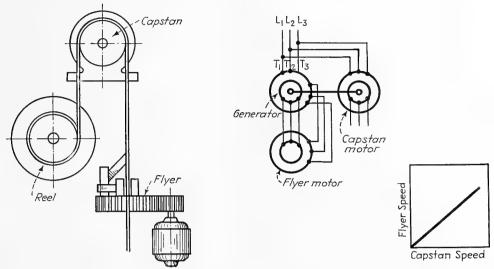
A wire-insulating machine requires a constant speed ratio between capstan motor and flyer for starting and running. The capstan motor drives a frequency changer or transmitter electrically connected to the synchronous motor of the flyer. The speed ratio between flyer and capstan is constant at all times.
